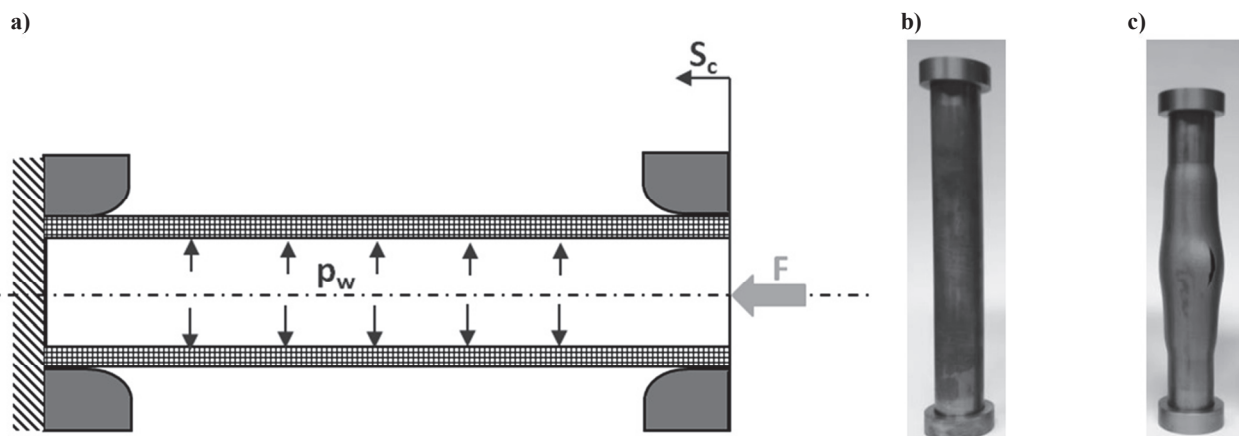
Free hydroforming of tube: a) schematic presentation of the process and main parameters, b) initial shape of tube specimen with special mounting ends, c) final shape of tube specimen after fracture occurred.
